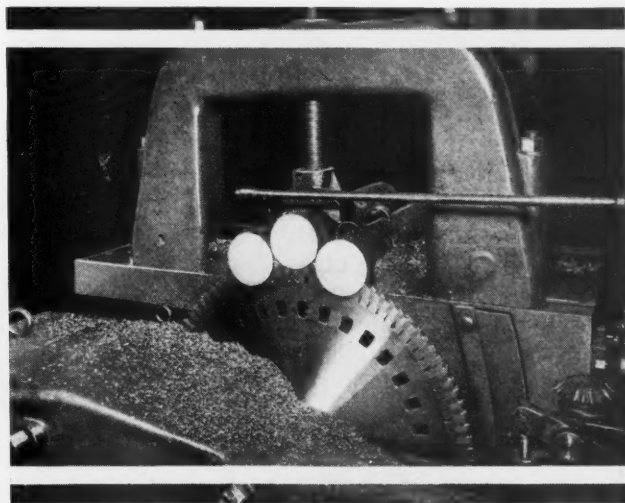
Cutting off Three 5-inch High-carbon Chromium Steel Bars in 9 Minutes on an Earle Gear & Machine Co.'s Lee-Simplex Saw
